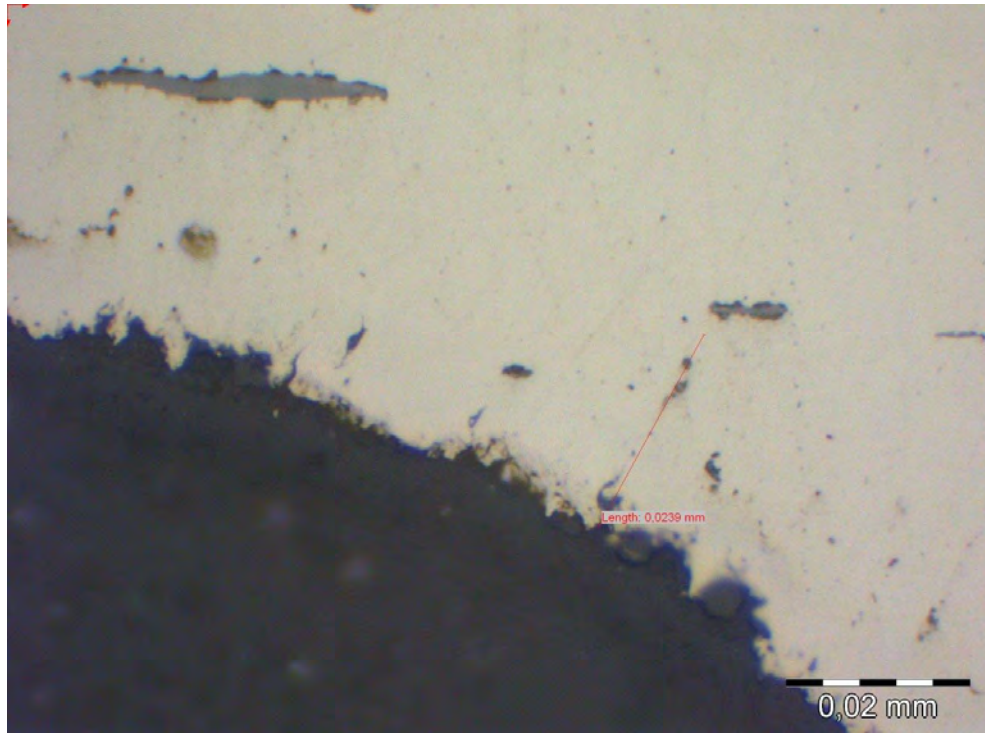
Cut six in crack at segment A, fourth ridge on barrel no. 14389
